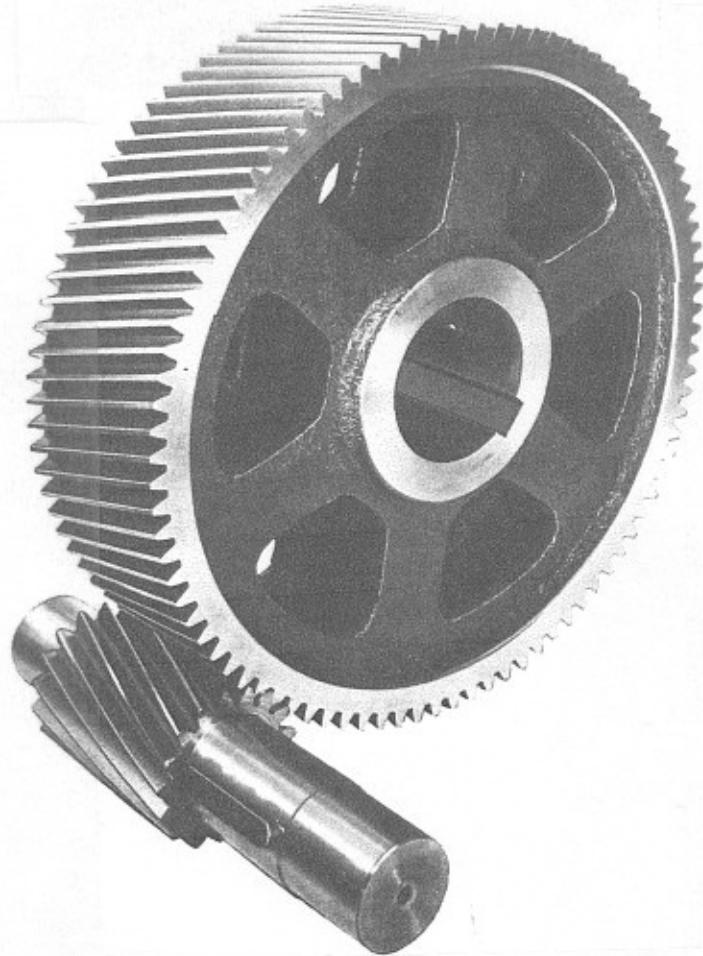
When a pair of meshing helical gears are mounted on parallel shafts, as shown, they must be of opposite hand. [Courtesy Horseburgh and Scott.]
